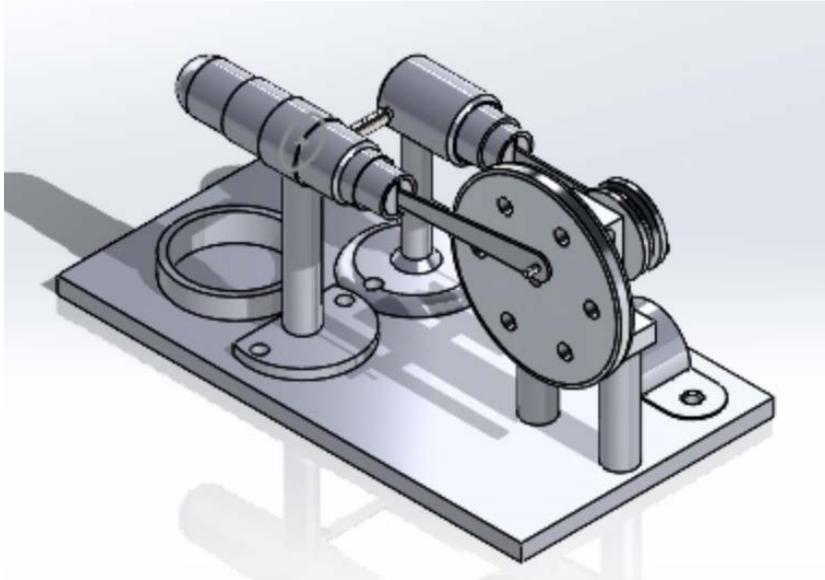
SolidWorks assembly of the Stirling engine kit.
